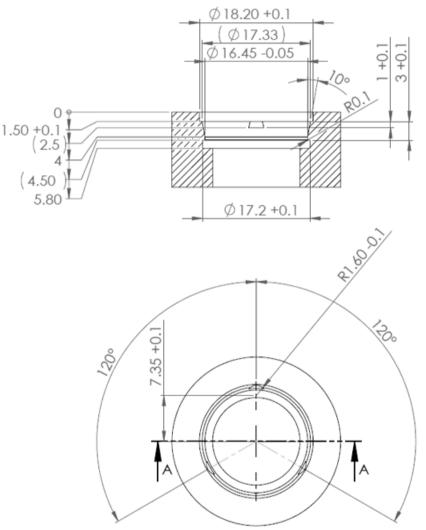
Dimension drawing: Workpiece drill hole for mounting the MDS D522 special version
